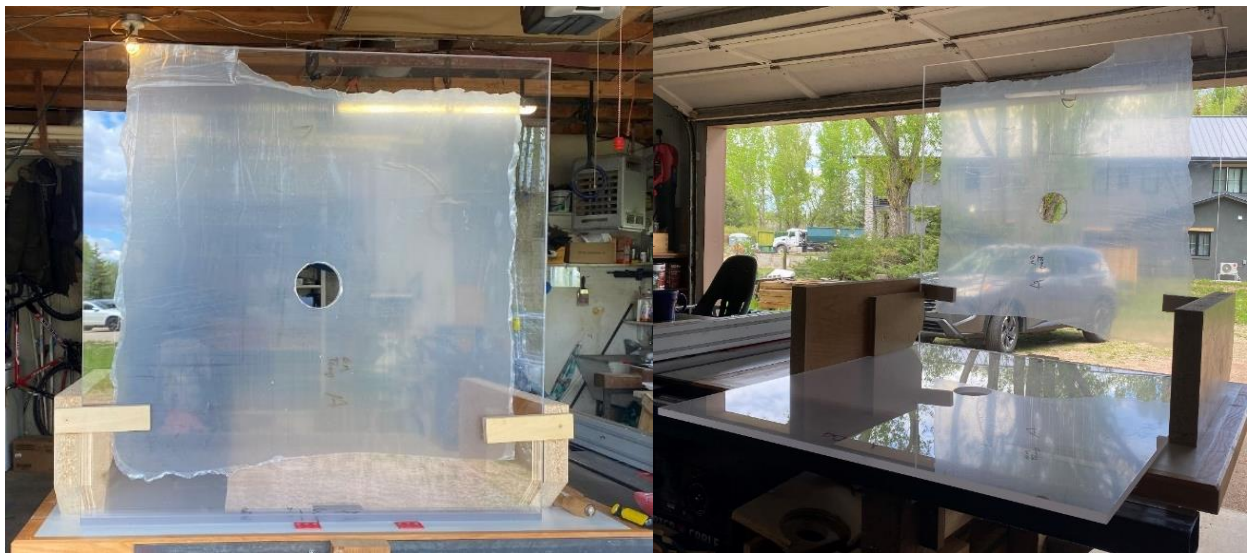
Gluing acrylic sheets together to form the main body of the tank.
